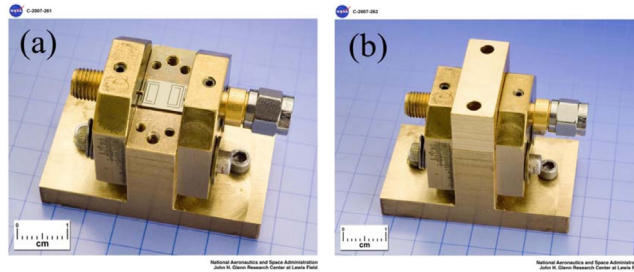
A photograph of the developed test fixture and a fabricated filter sample embedded in it. (a) Open fixture to view the SMA-feedline interface. (b) Closed fixture prior testing to minimize radiation losses.
